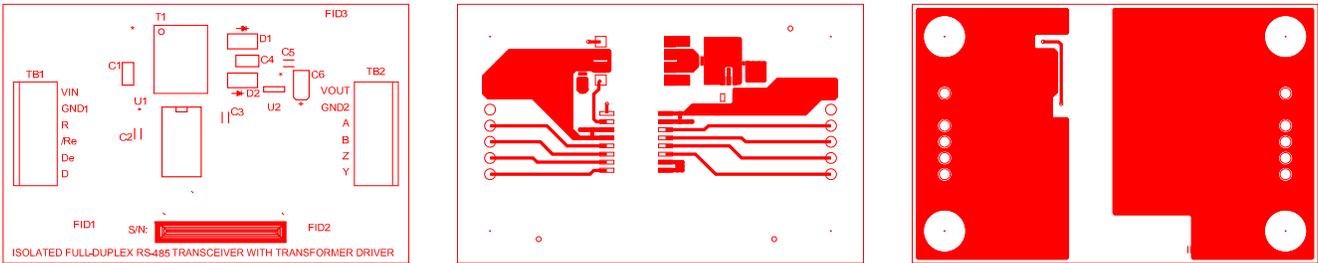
Board layout: Silk screen (left), top-layer (middle), bottom-layer (right)
